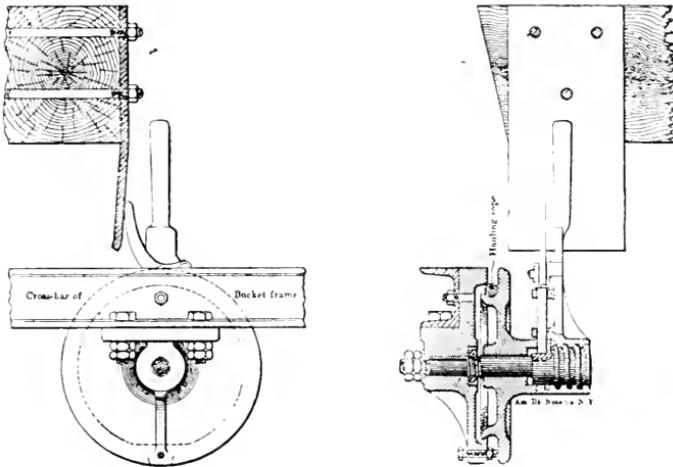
PLAN AND SECTION OF TRUCK OR RUNNER OF AERIAL ROPEWAY.
